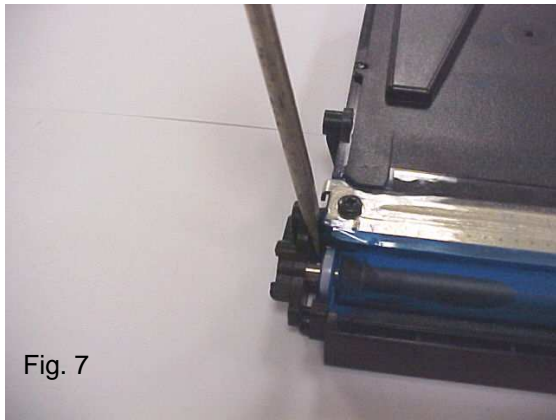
Remove the left side developer roller end plate by prying it off from the cartridge with a flat head screw driver.
